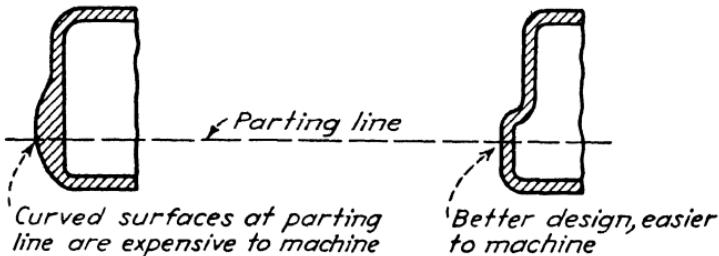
Mold parting lines should be placed for minimum of machining.
